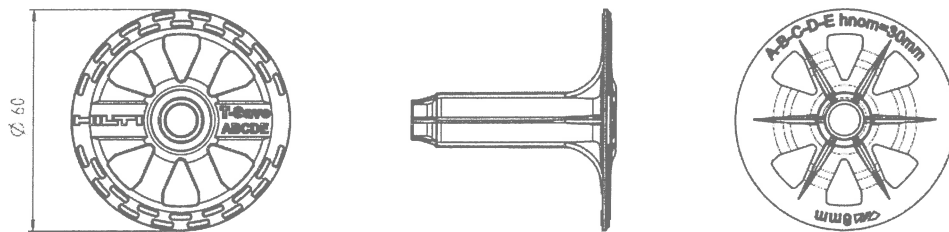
T-Save HTS-M - assembled sleeve, plate and composite pin
